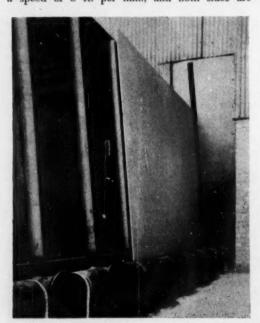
Close-up View of the Roller Conveyor at the Discharge End of the Plant Shown in Fig. 1
